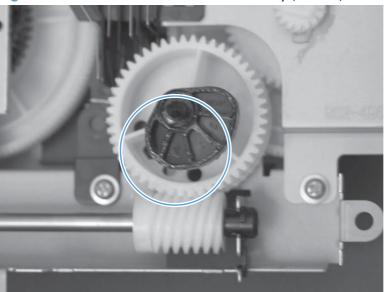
Reinstall the main drive assembly (4 of 11)
